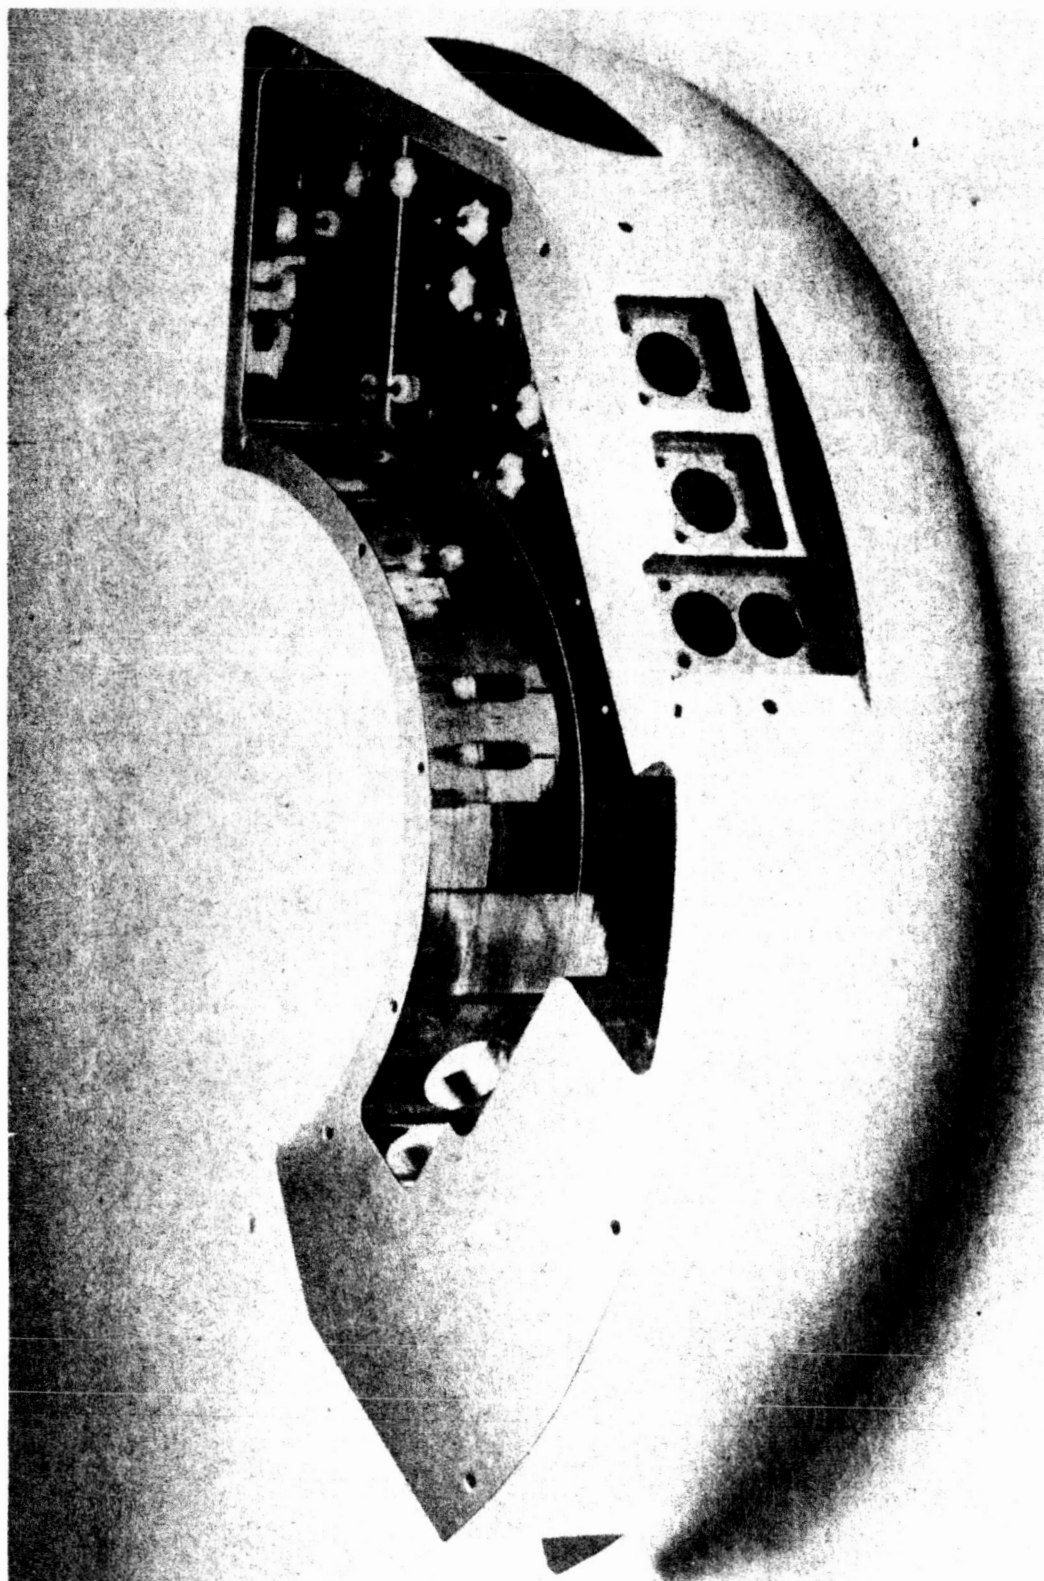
PROTOTYPE TRANSMITTER HOUSING
